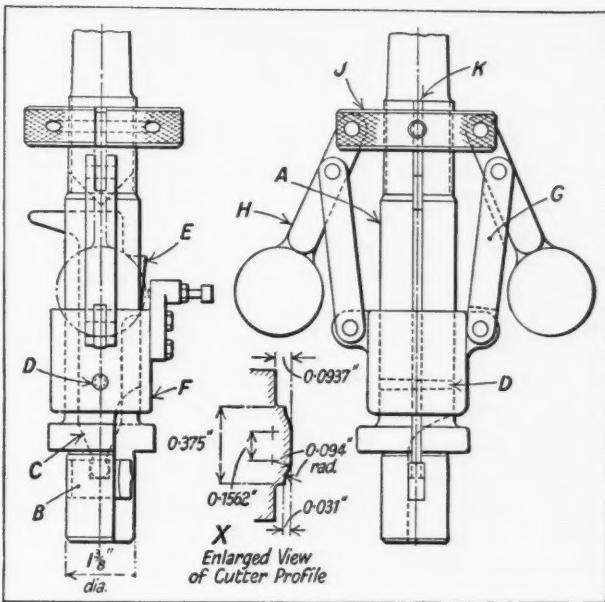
When the spindle rotates, governor arms (H) move outward, raising sleeve (F) and causing lever (C) to pivot, which forces the recessing tool into the work
